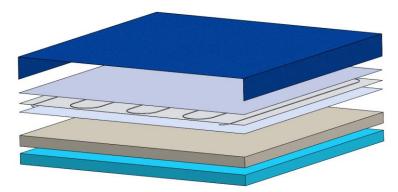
Cross-sectional, exploded view of the layers for our 2'x2' mattress design. Materials from top to bottom include: firm memory foam, softer memory foam, deflector, wire heating element embedded in porous fabric, thin cotton overlay, and outermost covering of polyurethane-coated nylon.
